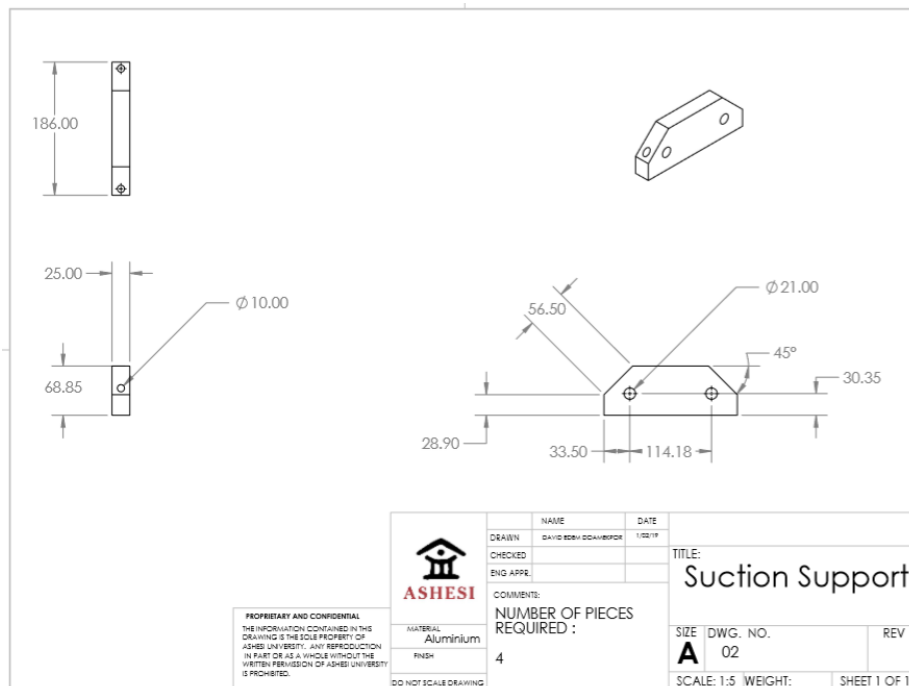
Drawing Dimensions for the Suction Support Fixture
